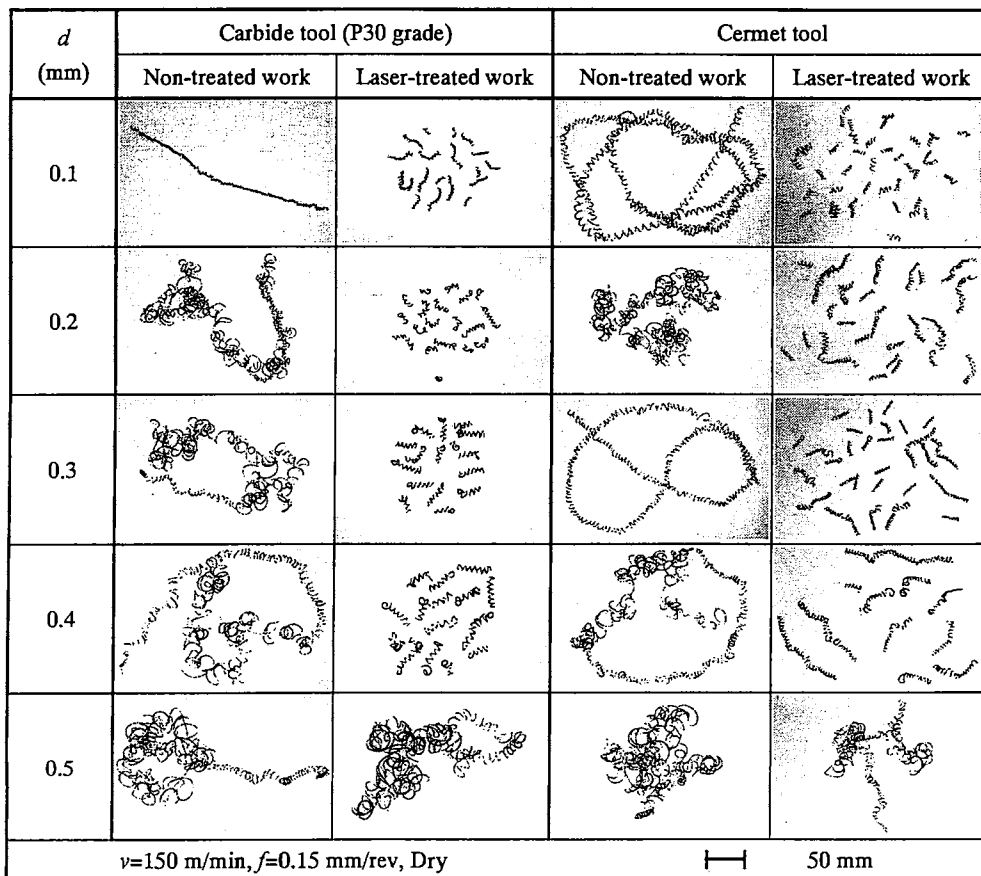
Change of chip form with laser heat treatment of workpiece and depth of cut
